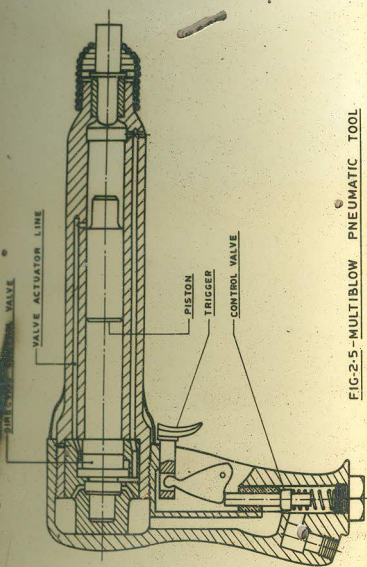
MULTIBLOW PNEUMATIC TOOL
